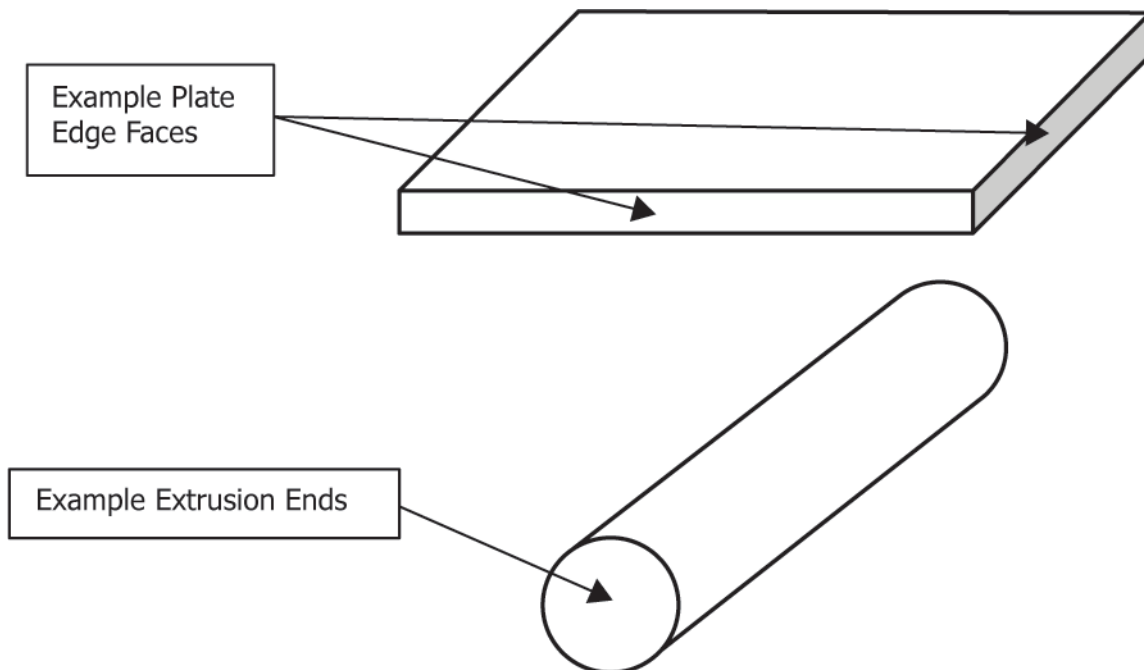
Examples of Plate and Extrusion Edge Faces/Ends
